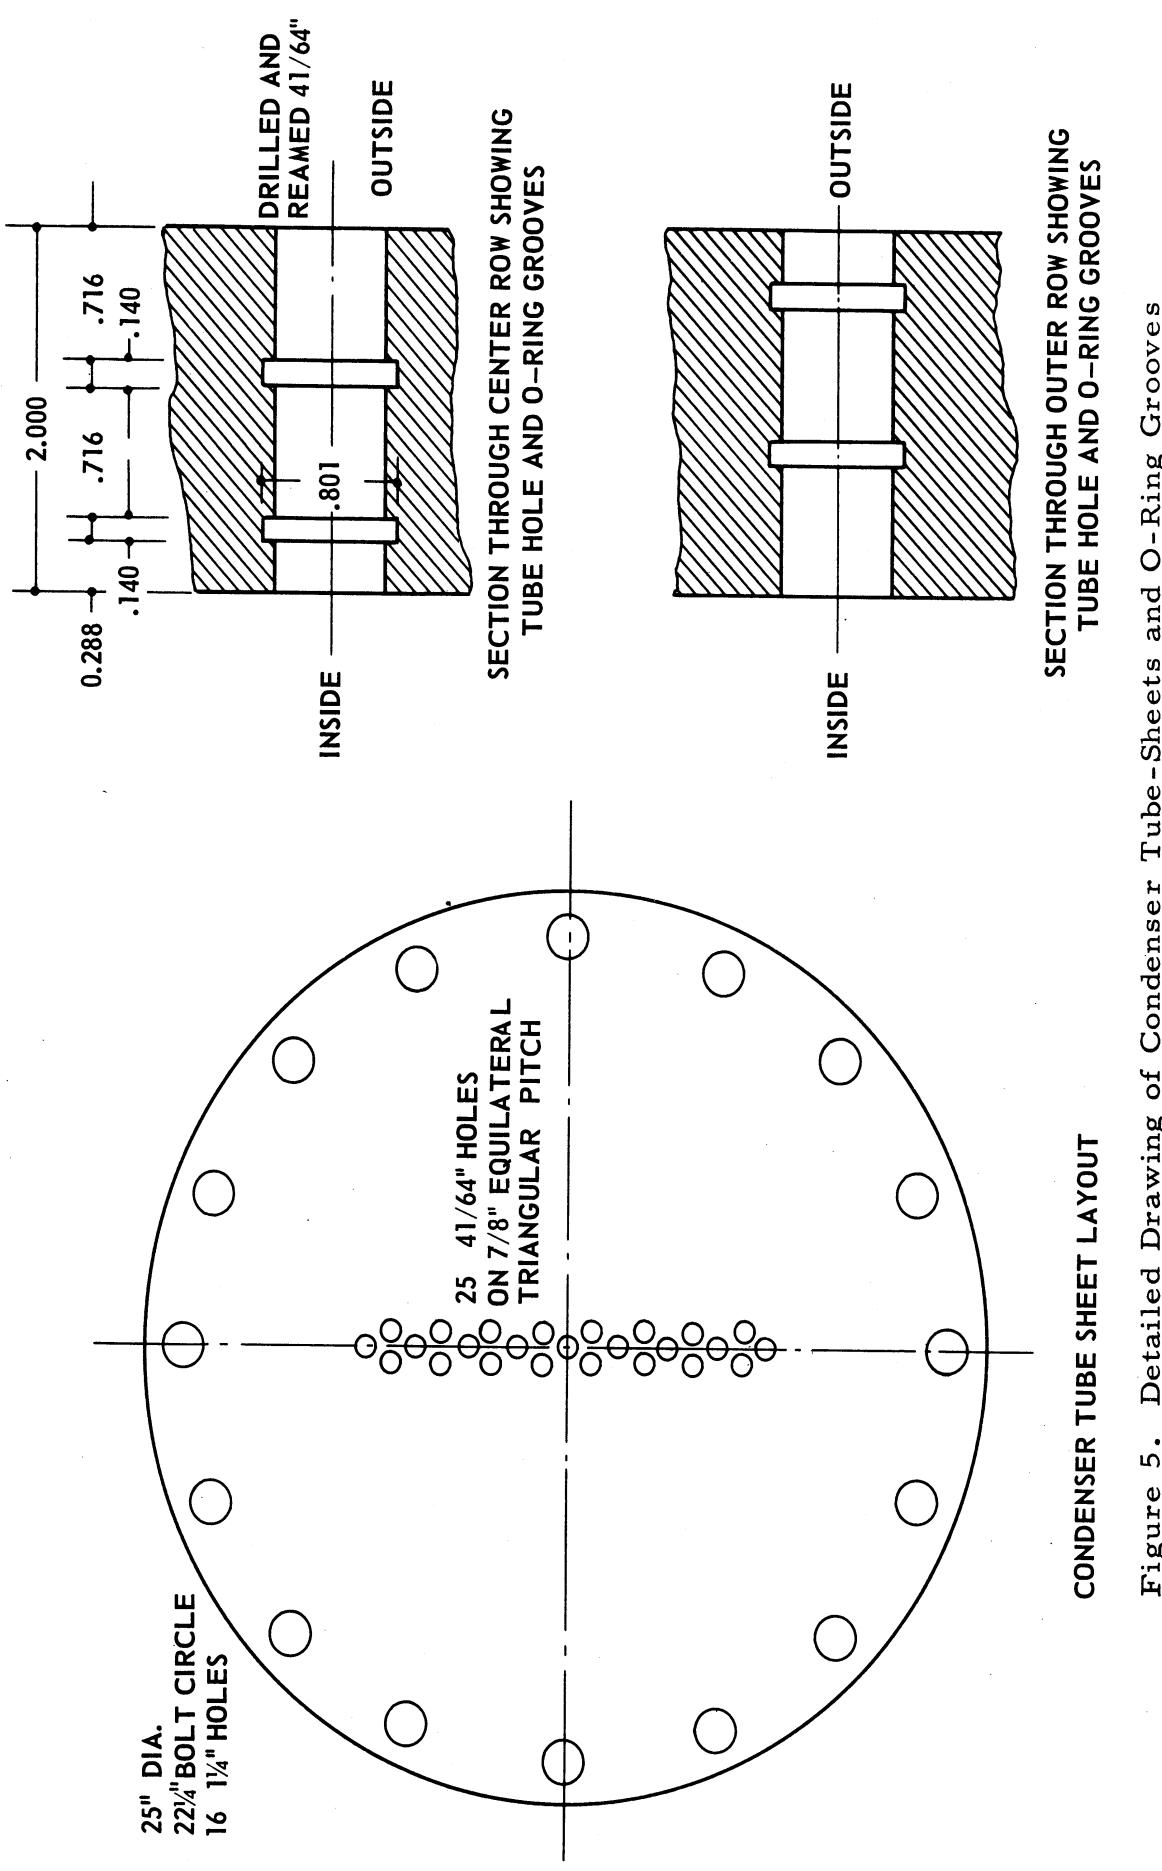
Detailed Drawing of Condenser Tube-Sheets and O-Ring Grooves
